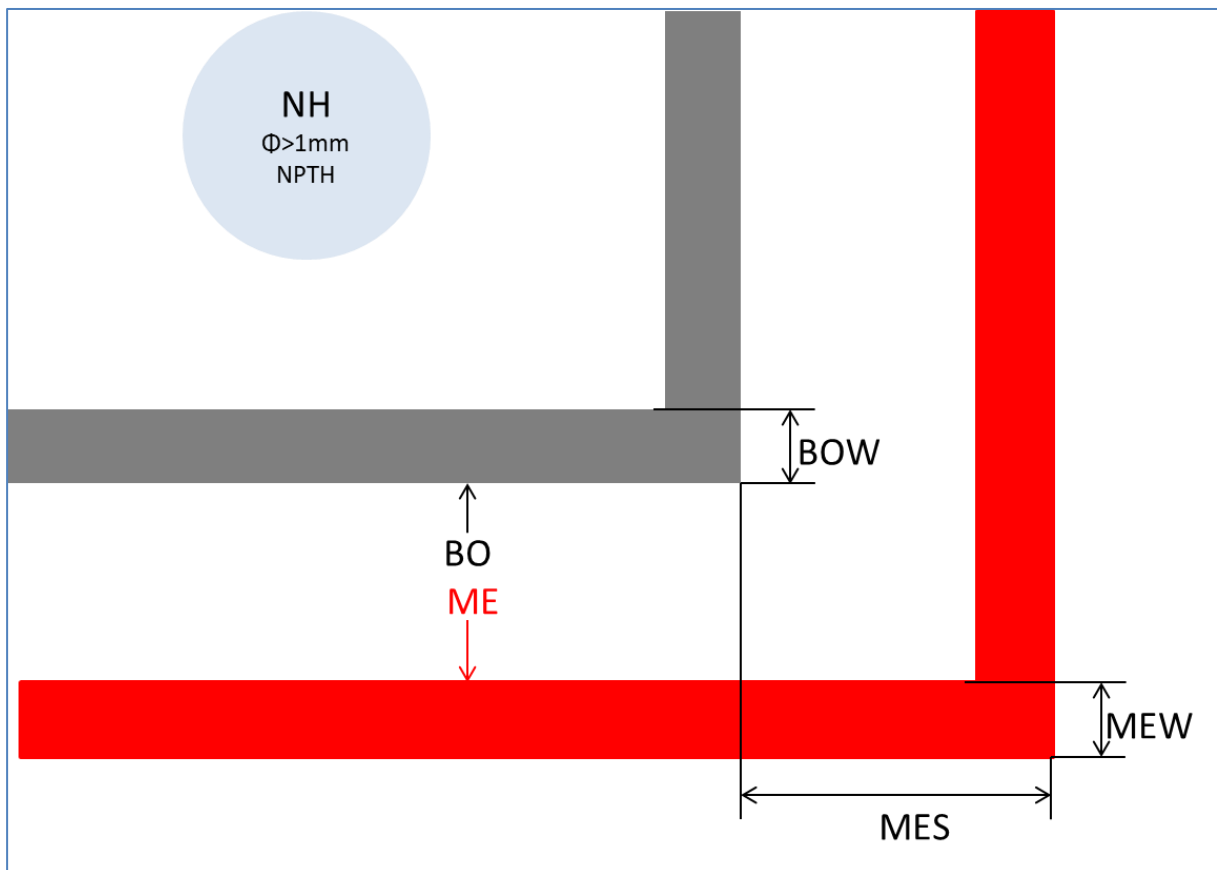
Board Outline BO frame and Position Hole NH design rule
